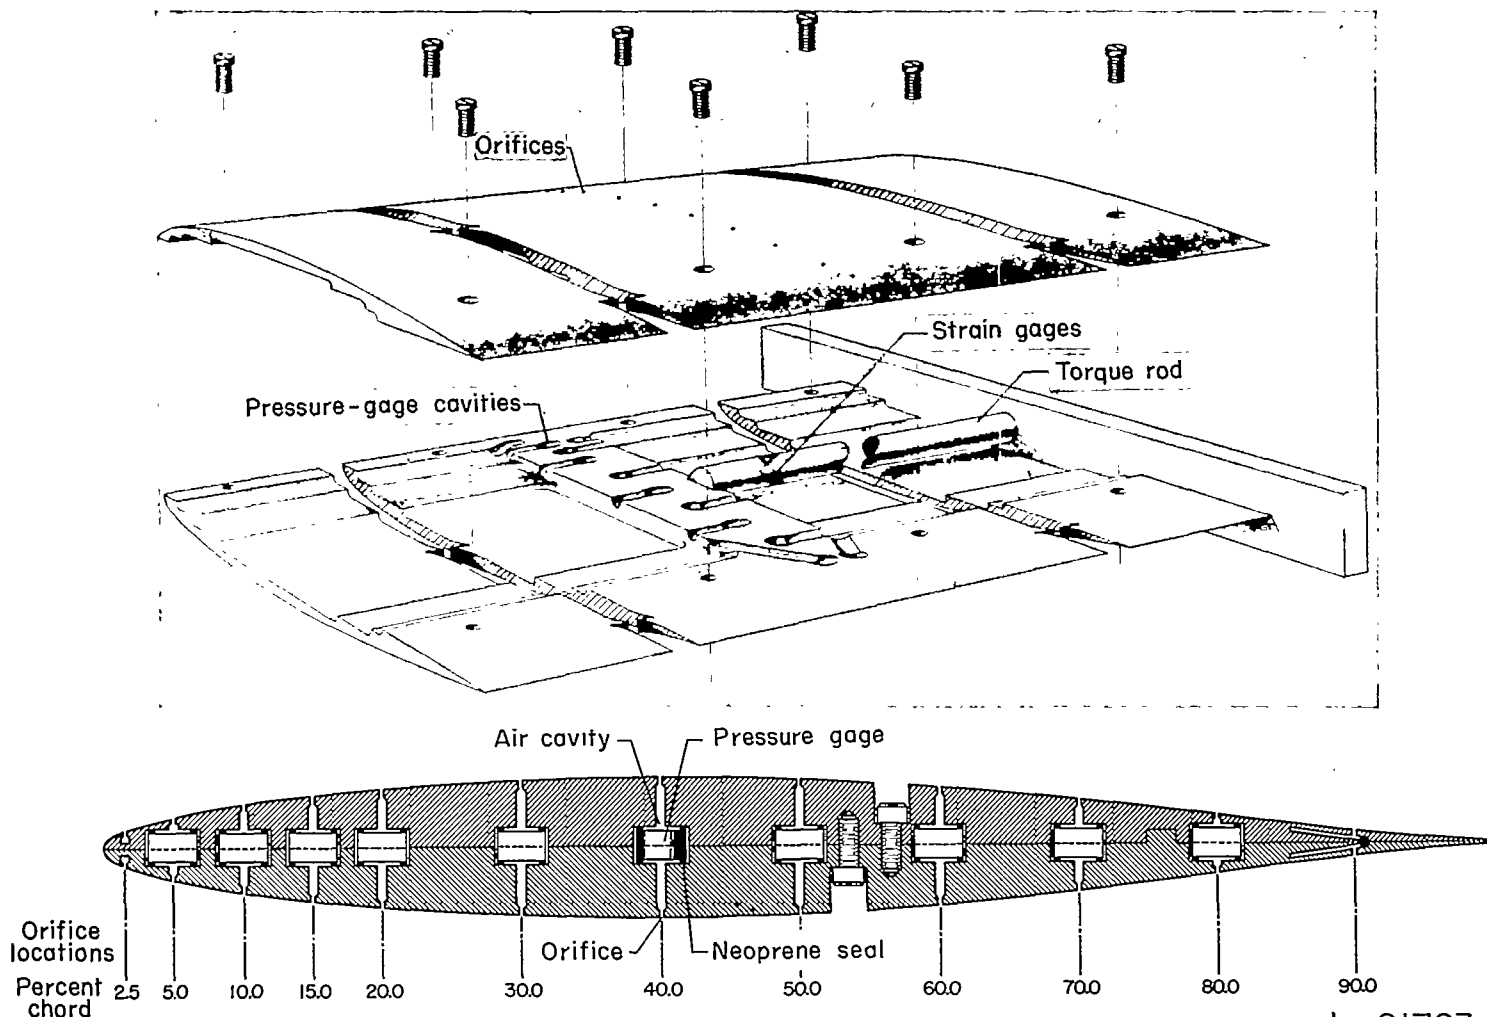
Exploded view and cross section of model showing location of pressure gages, orifices, and position indicator.
